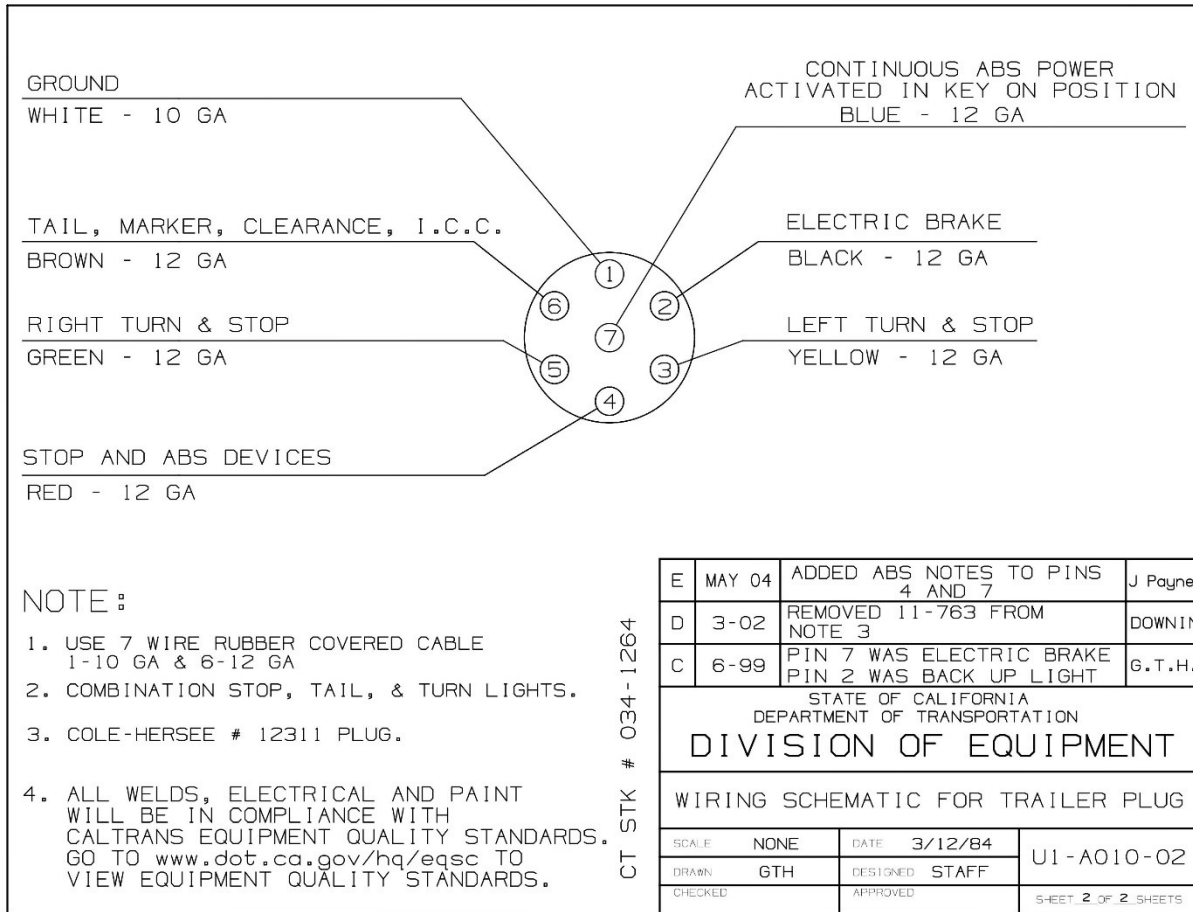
Drawing for wiring of 7-pin connector for trailer plug
